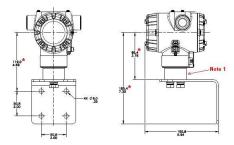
STT750 with adapter housing - Horizontal Wall Mounting
